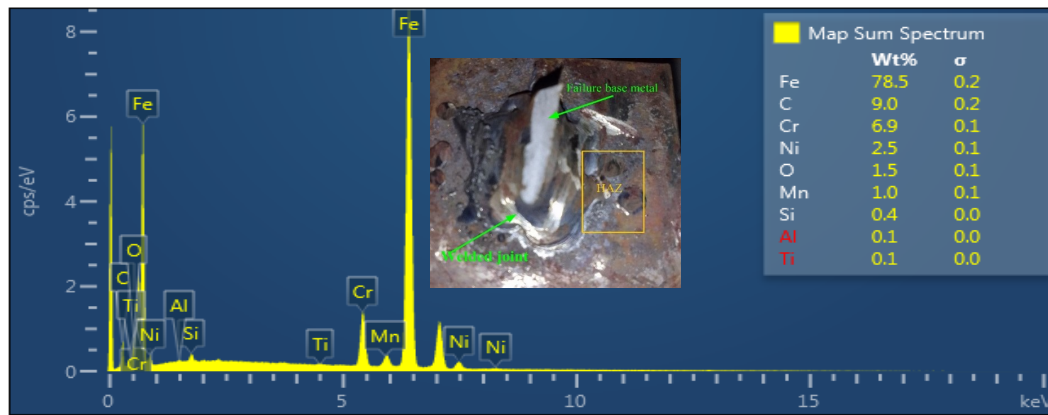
DES analysis of weled joint for failure surface at after fracture zone: (a) EDS image at failure surface at after fracture zone, (b) different chemical componenet at failure surface at after fracture zone
